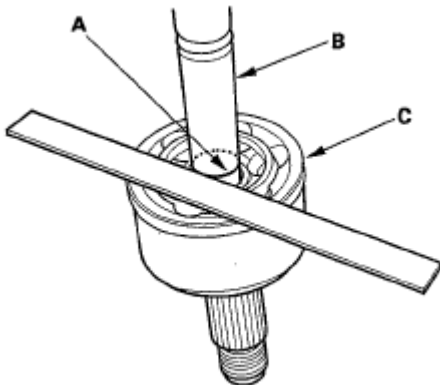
Making Match Mark On Driveshaft And On Outboard Joint End
